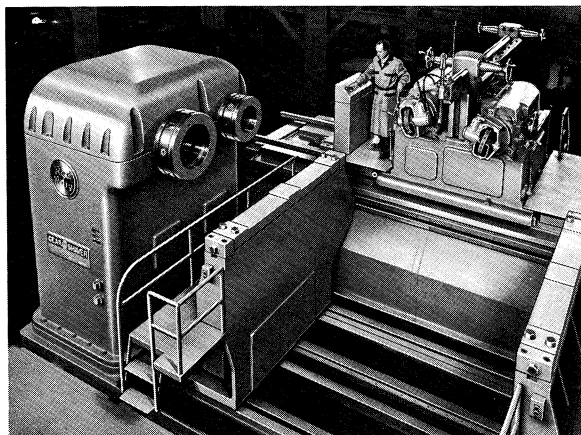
A Model GCK-180 in. Red Ring shaving machine equipped with two headstocks and two cutter heads.
